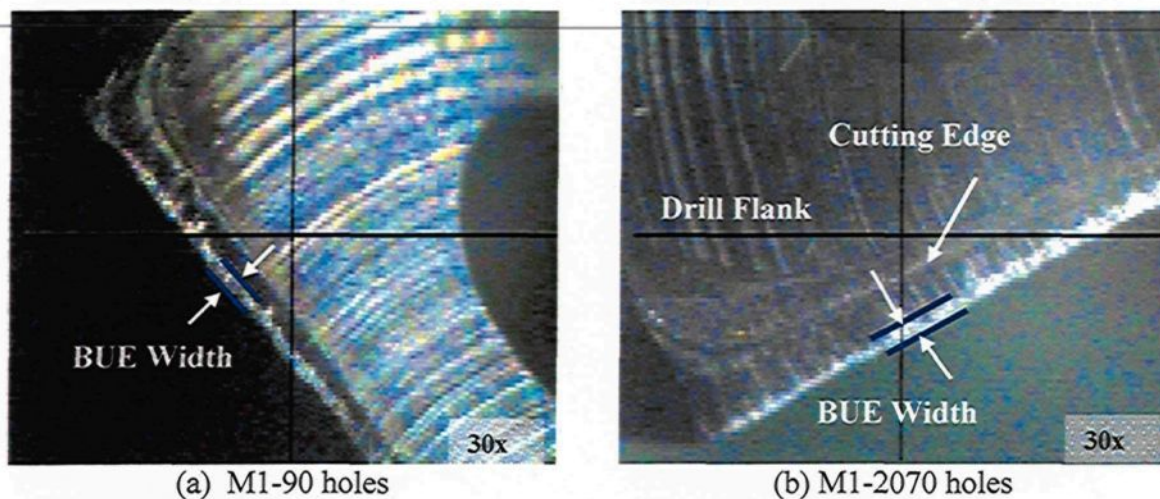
Photographs showing the progress of built-up edge (BUE) on the tip of the cutting edge (a) after drilling 90 holes, and (b) after drilling 2070 holes.
